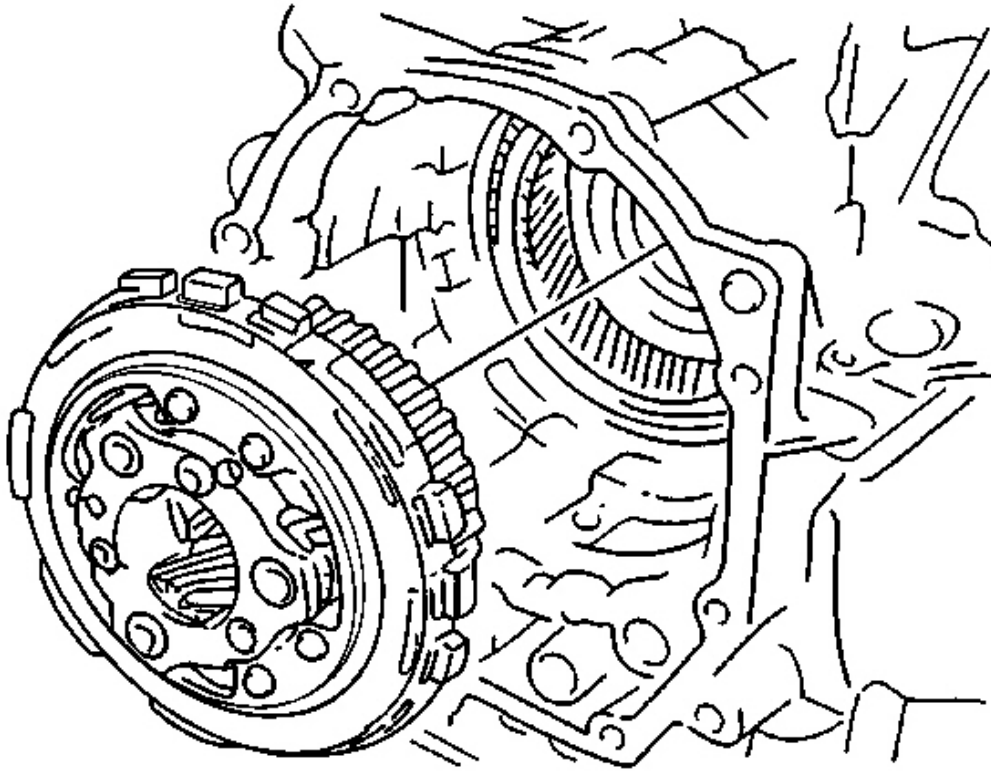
No. 2 One Way Clutch & Planetary Gear
